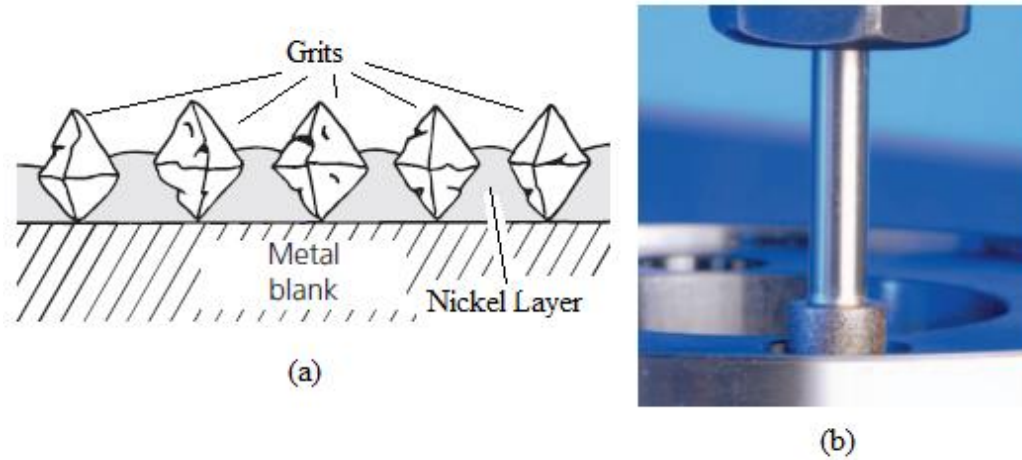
cBN wheel surface profile (a). cBN wheel appearance (b). [39]
